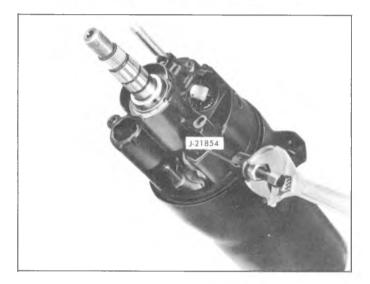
B-77-Removing Bearing Housing Pivot Pins
